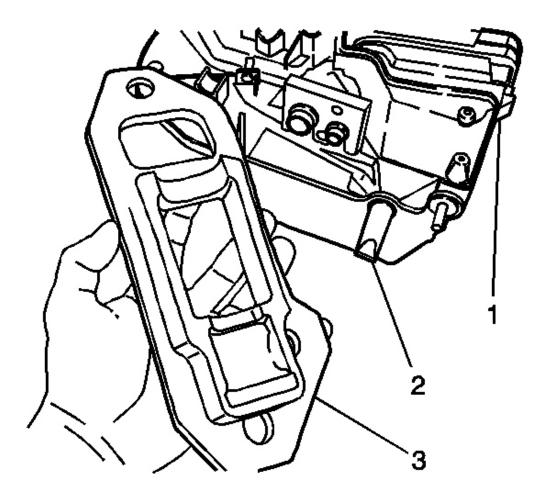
Removing/Installing HVAC Pass-Thru Seal & Drain Hose - Auxiliary Courtesy of GENERAL MOTORS CORP.
